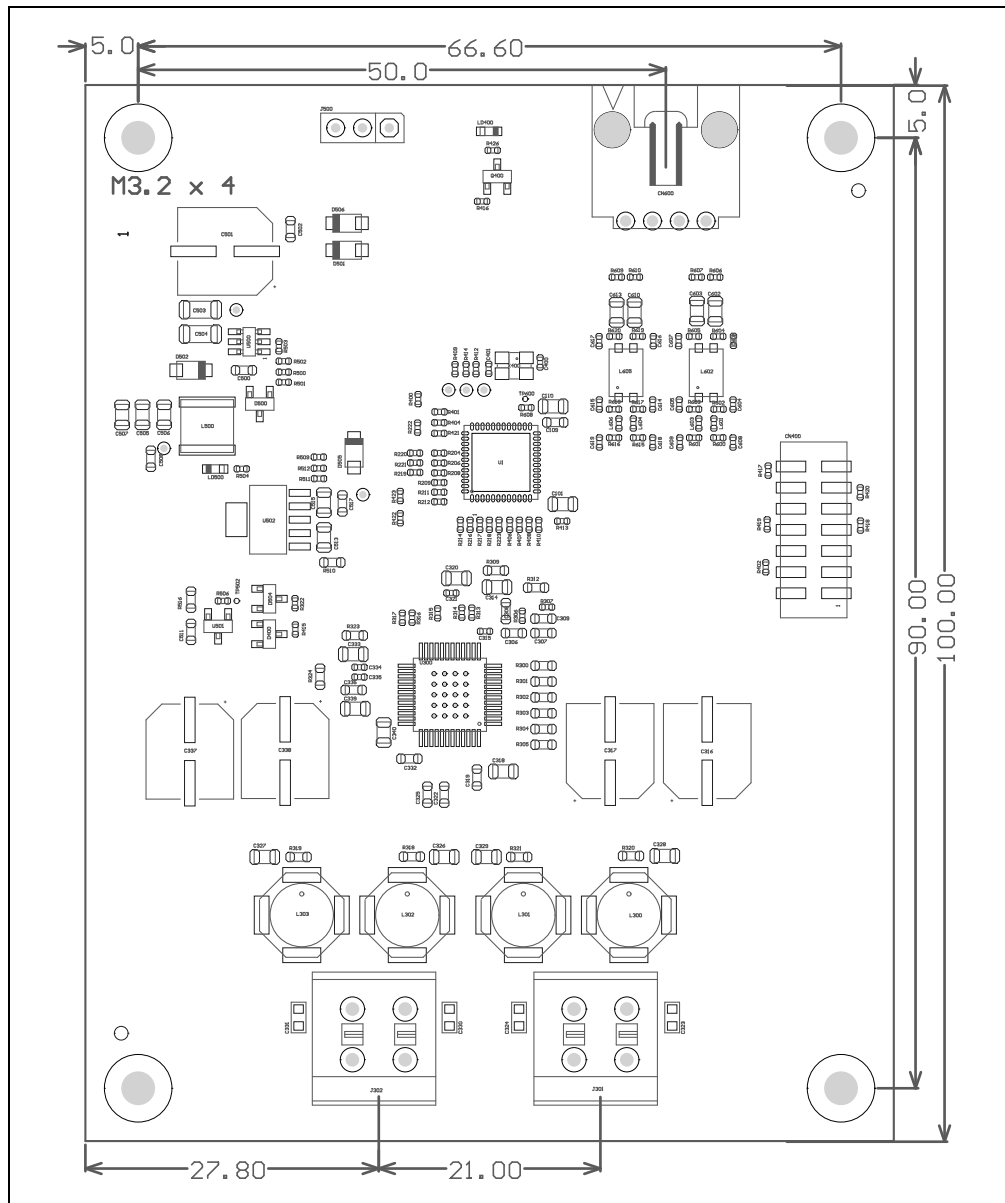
ASSEMBLY PLAN – BOTTOM VIEW
